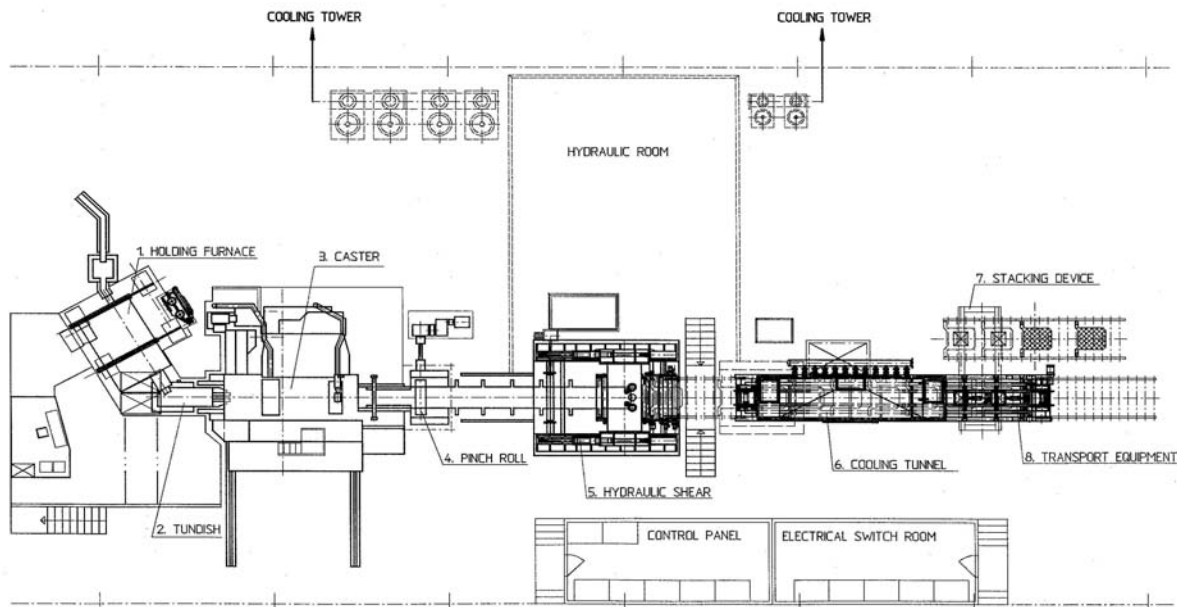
CONTILANOD® Line with hydraulic shear-system
